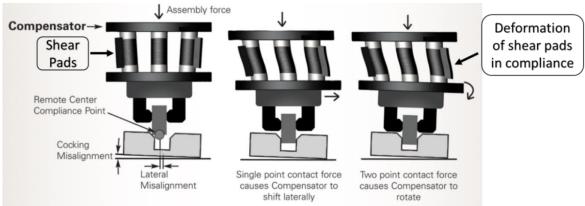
Example of an RCC using shear pads<sup>9</sup>
